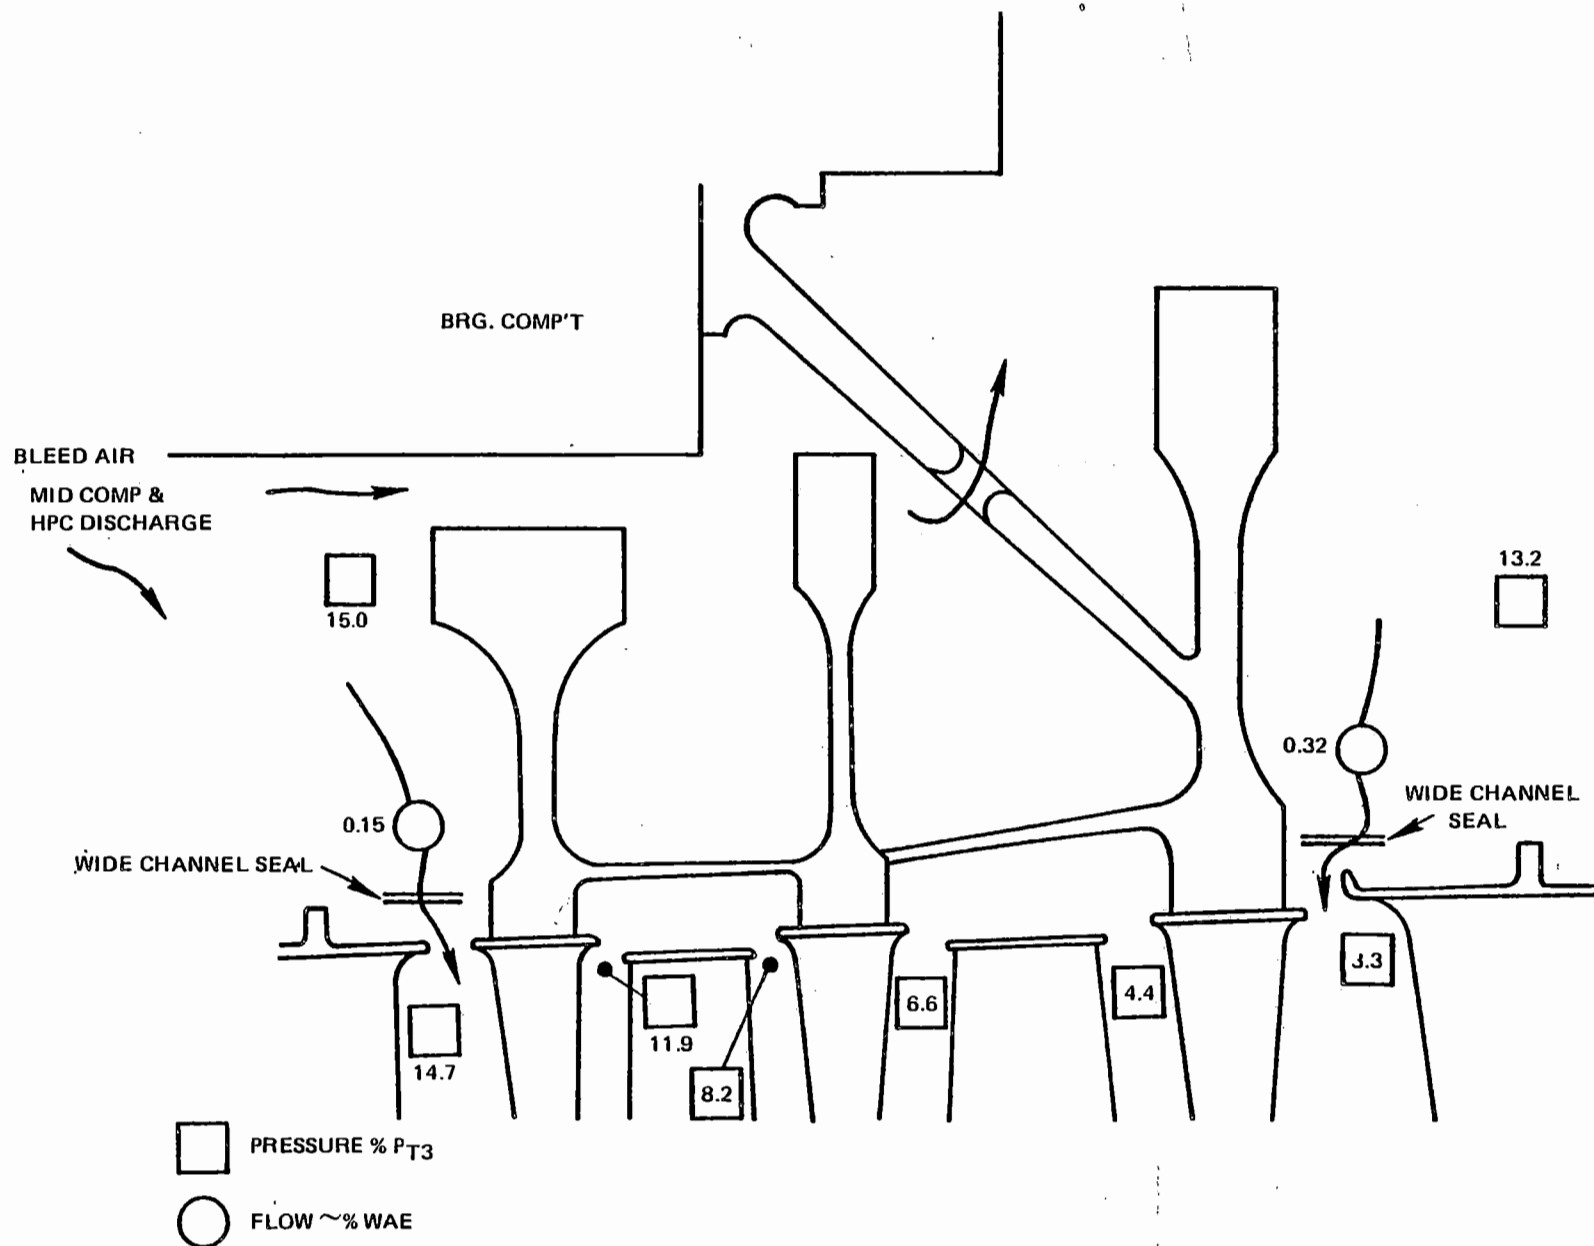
Geared Engine Low-Pressure Turbine Wide Channel Seals for Thrust Balancing
